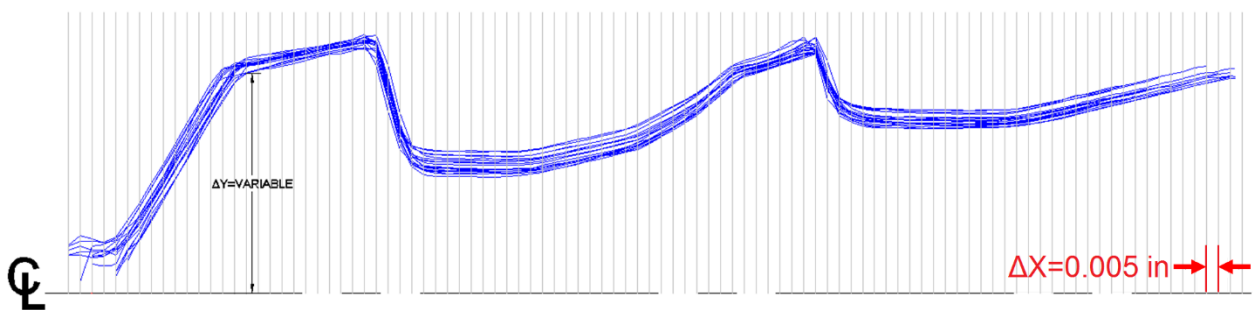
Superimposed Profiles of the As-Built Tube Coined Pressed End Profiles Divided at a Constant Horizontal Increment
